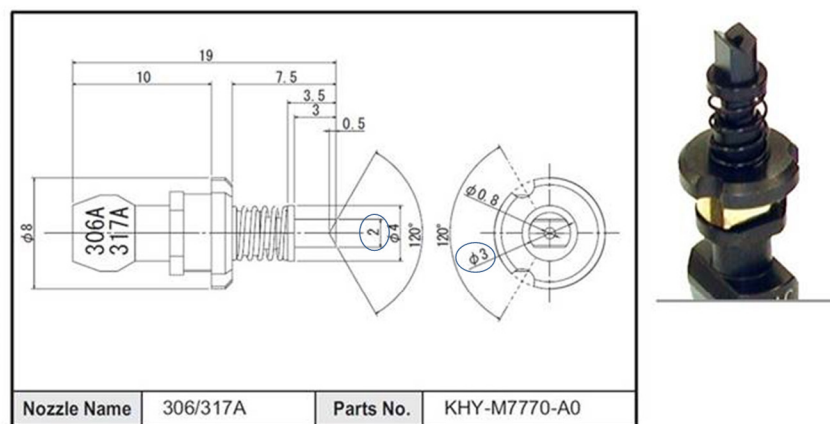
An example of a nozzle with outer size of 2mm x 3mm as shown on the left drawing. See the circled dimensions. Right image is the actual nozzle tip. Dimensions in mm.
